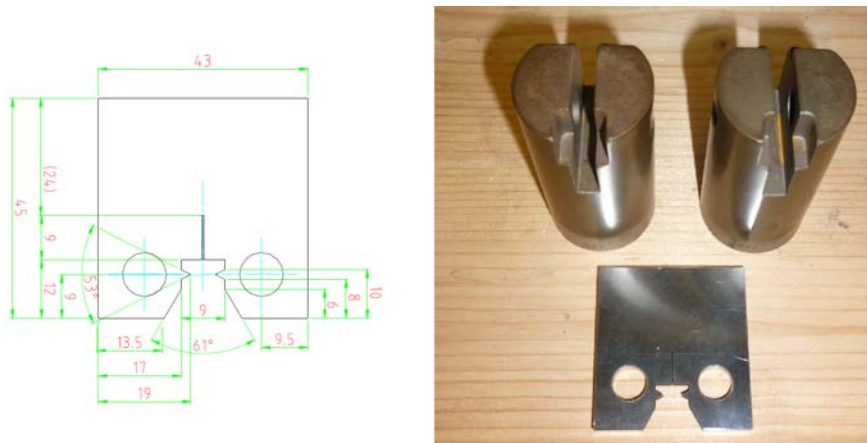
The FCGR test specimens with accordance to ASTM E1820 standard: technical drawing (left) and machined specimen with special mounting grips (right).
